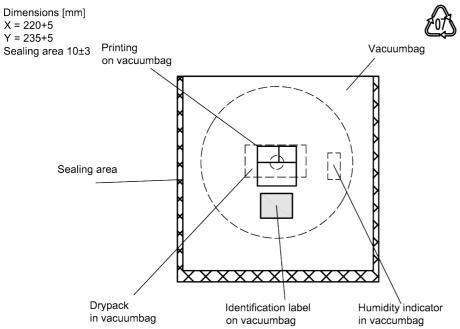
Drawing of moisture barrier bag (MBB) for reel with diameter of 180 mm.
